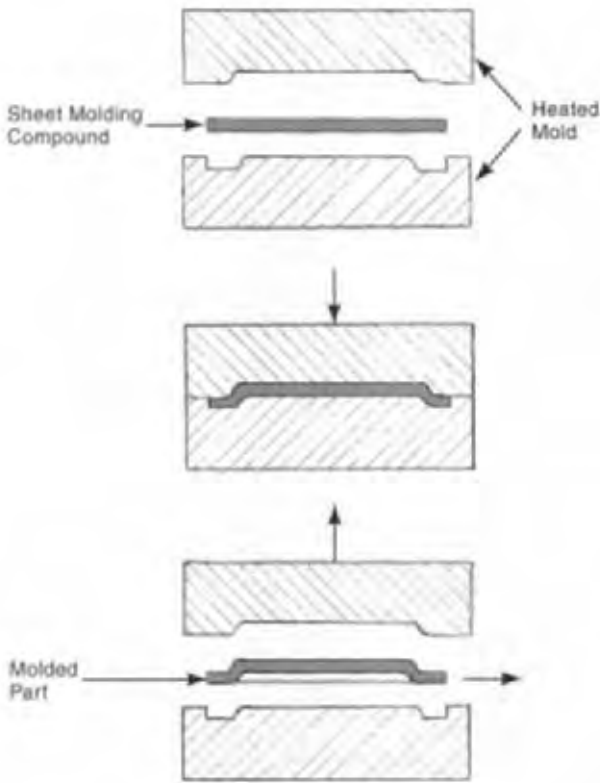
G10 Matched metal mold forming of reinforced thermosetting sheet molding compound (SMC).
